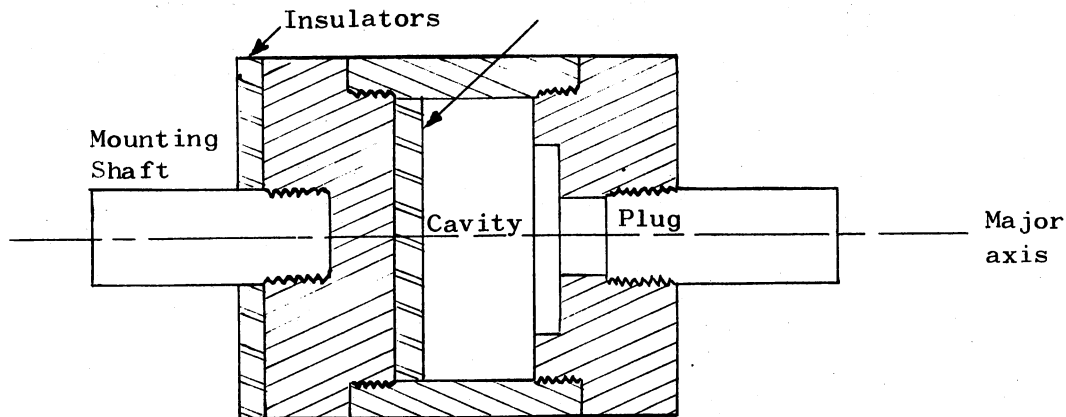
Cross-Section of the Mold Assembled Prior to Rotation
